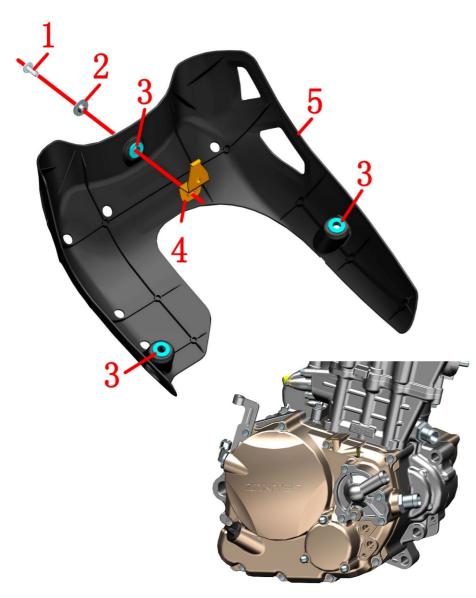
LOWER SHROUD		Light-clutch version lower shroud component	СНК	Q
